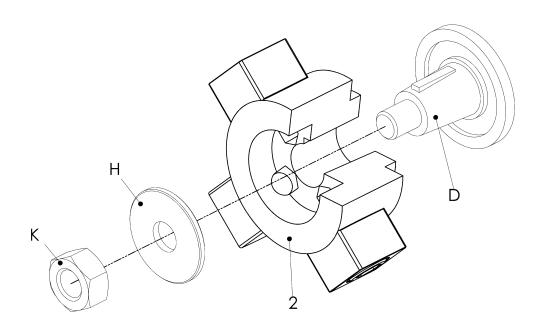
Mounting the hub spider (2) with conical bore and keyway
